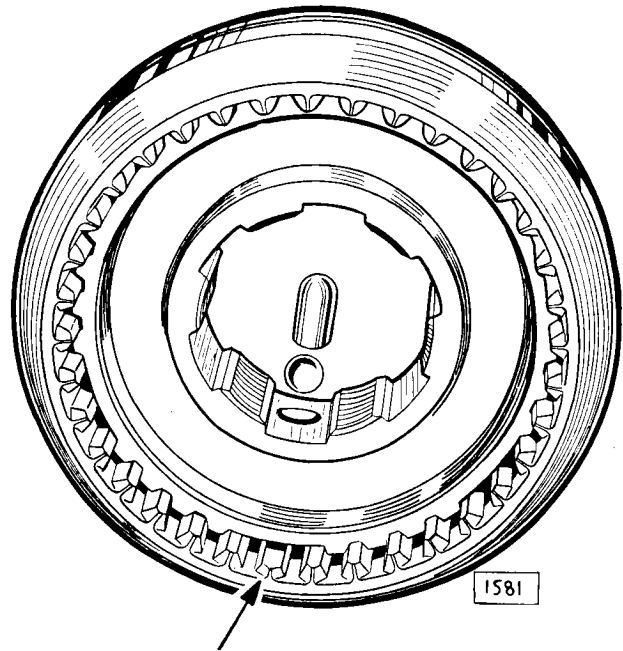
The relieved tooth in the operating sleeve must be in line with the interlock holes in the synchro sleeve.
